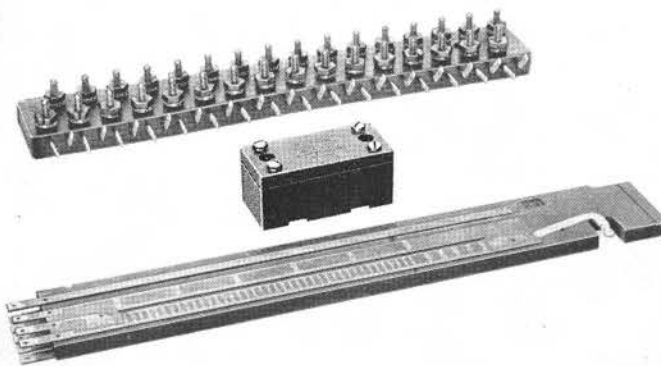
Typical shellac composition parts with metal inserts embedded during the molding operation
